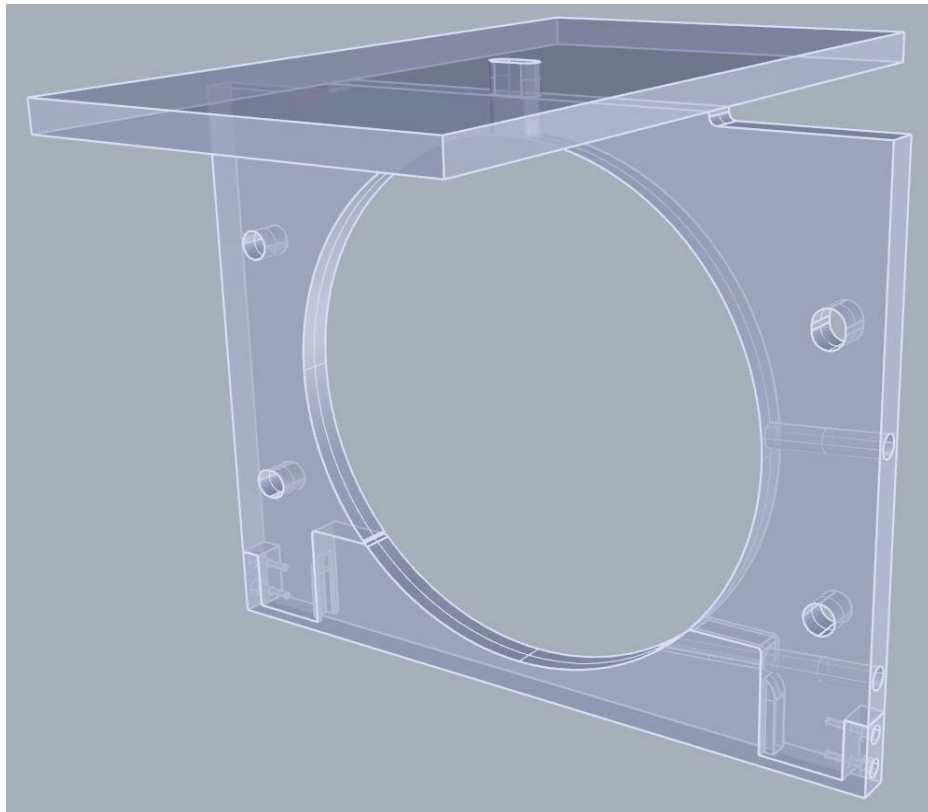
3D fabrication model of trolley plate, with bore holes for cables ghosted in along the right side of the plate. Image courtesy of TriPyramid.
